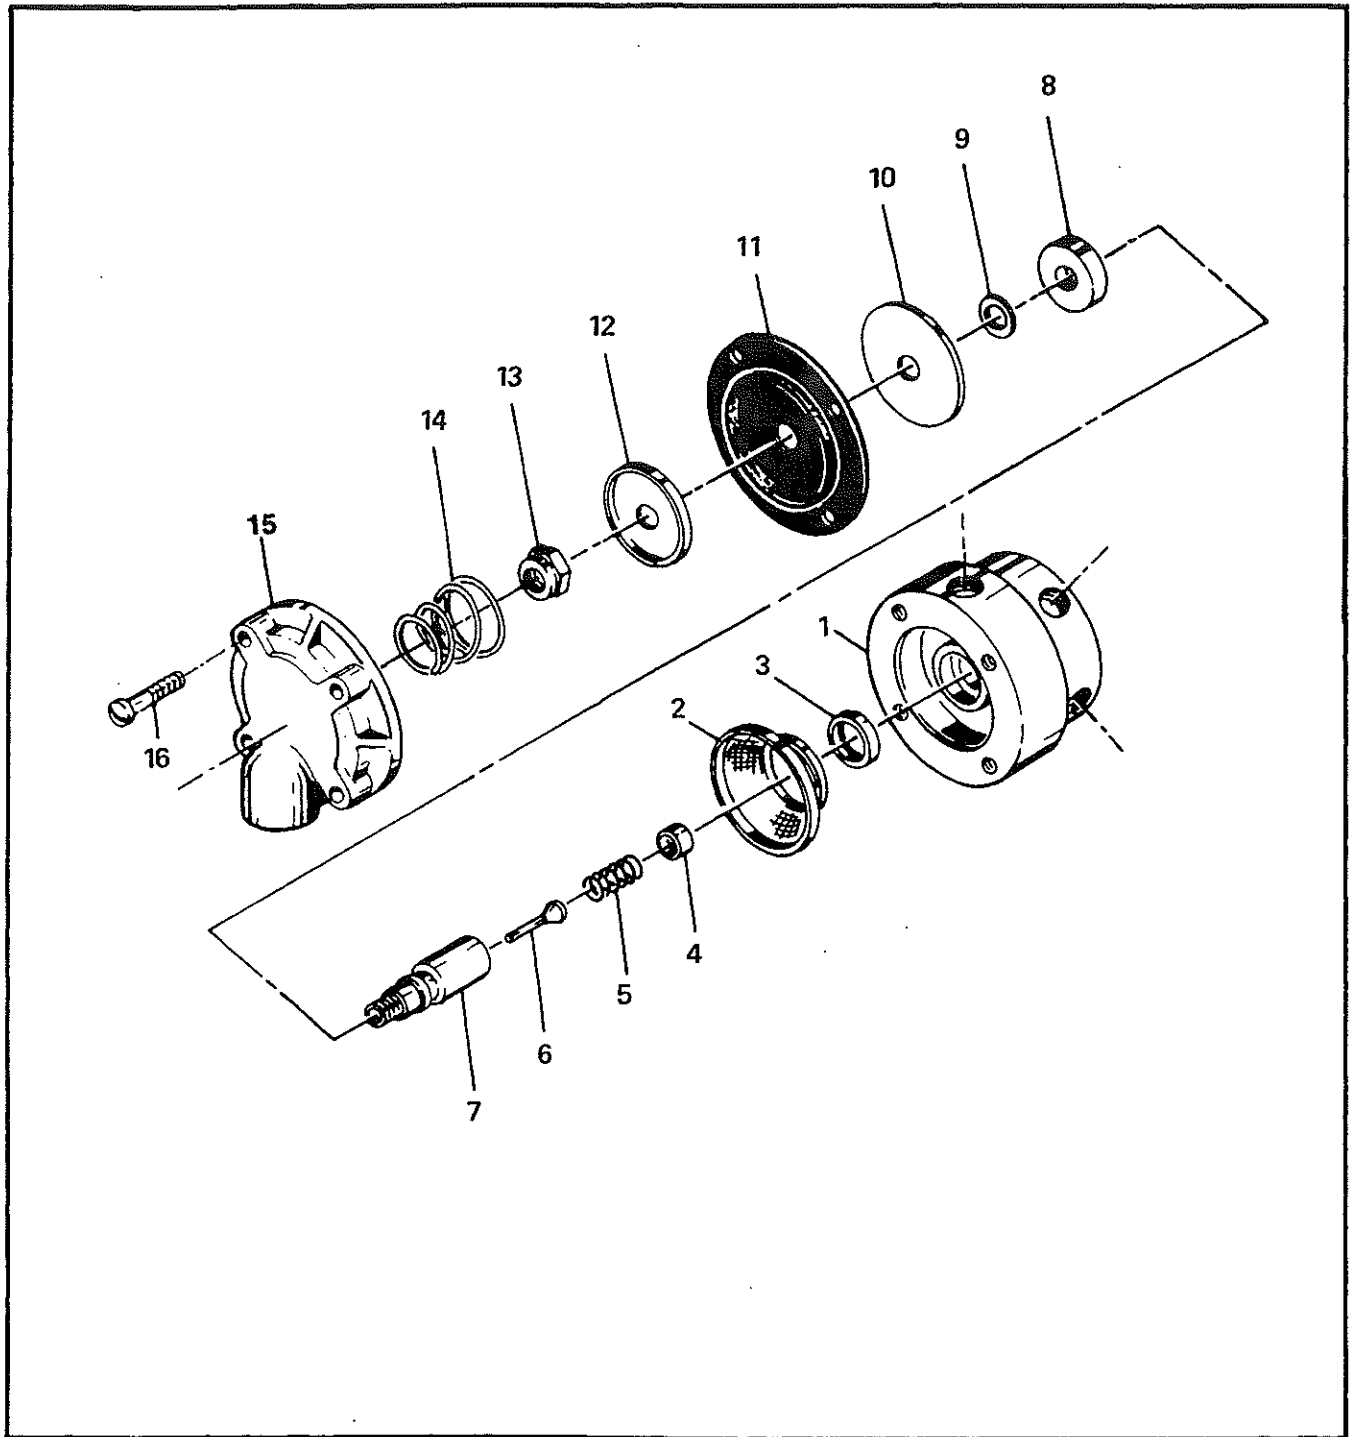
FUEL MANIFOLD VALVE ASSEMBLY.
